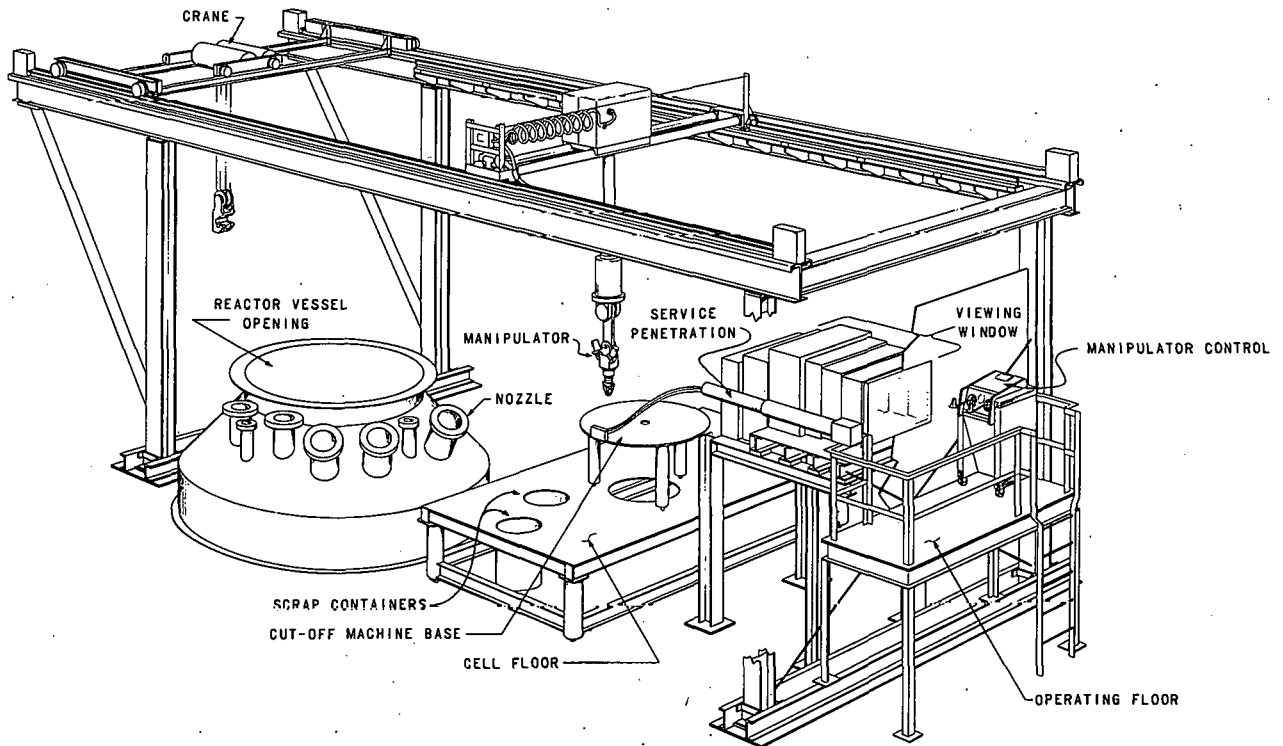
Partially completed mock-up of subassembly cut-off machine supporting structure and related equipment
